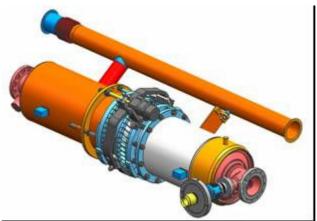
The cavity dressed with the modified helium tank and piezo blade tuner.
